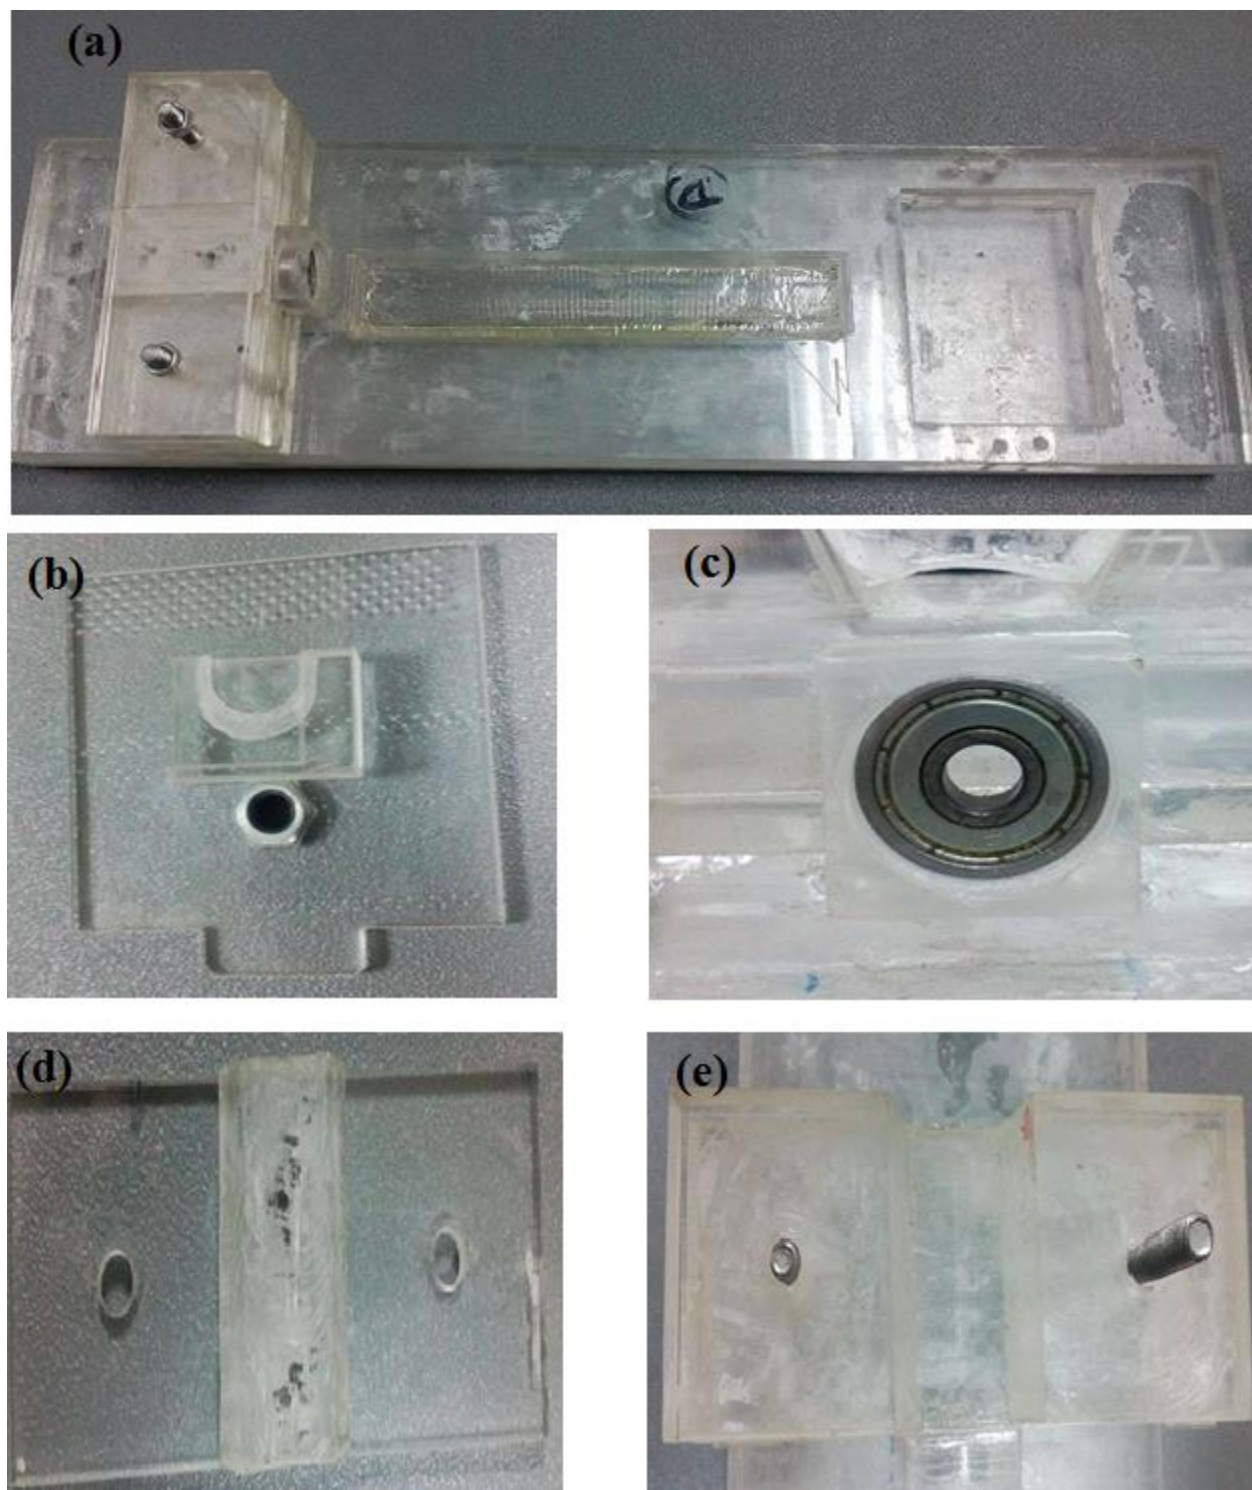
(a) Assembled parts (b) Plunger mover along with part to fix the plunger and nut affixed for screw (c) ball bearing attached in acrylic part (d) cap on syringe holding having holes for screw (M4) (e) syringe holder and screws for fixation of cap
